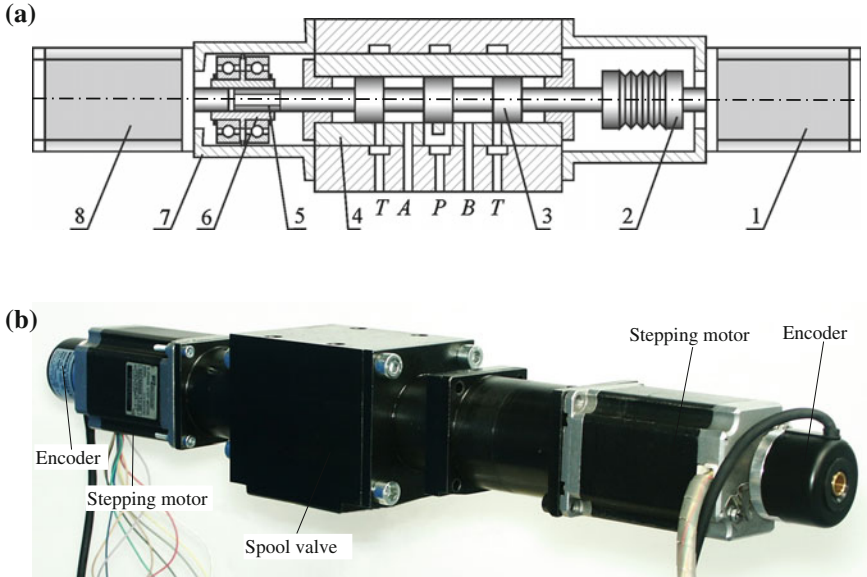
Electrohydraulic spool valve with two stepping motors working differentially: a drawing, b photo
